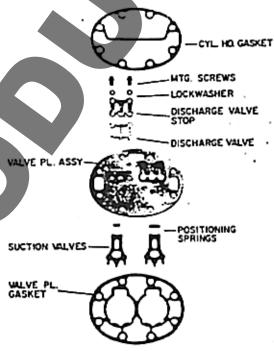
Figure II TYPICAL OLD STANDARD SERVICE VALVE PLATE PACKAGE
